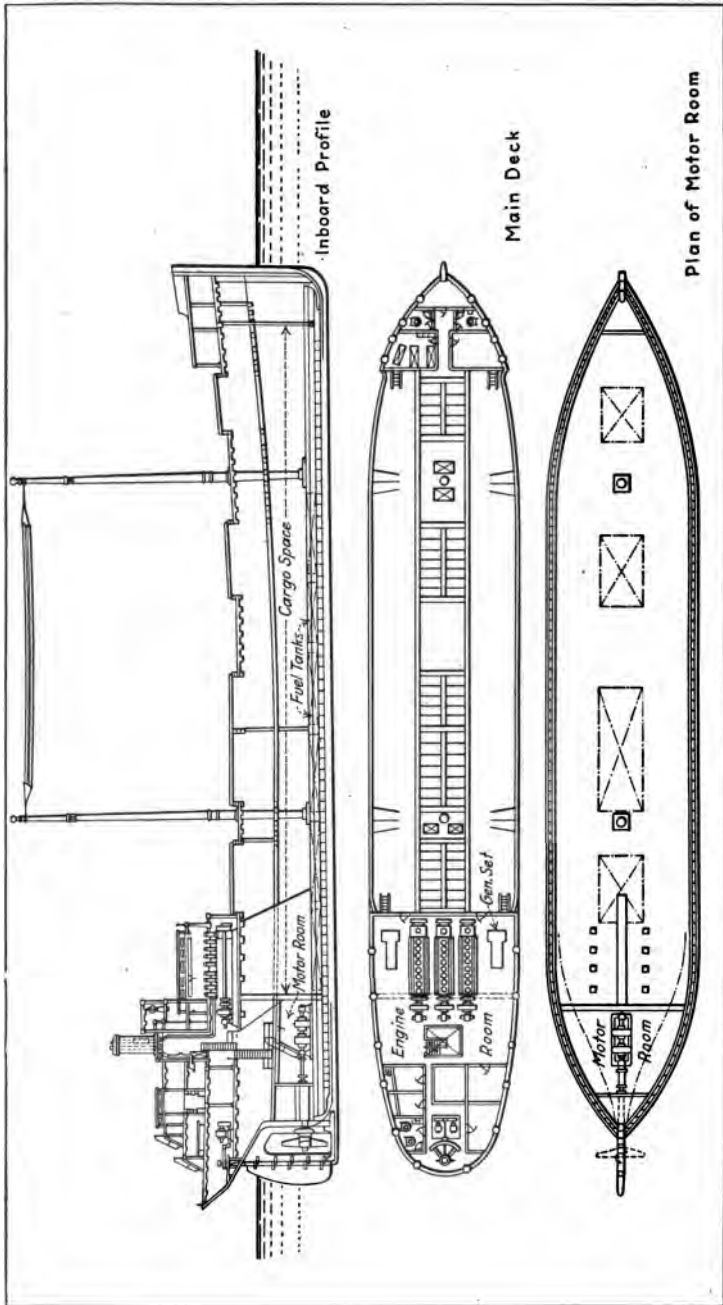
Profile and Deck Plans Showing Machinery Arrangement of a Converted Ferris-type Hull
